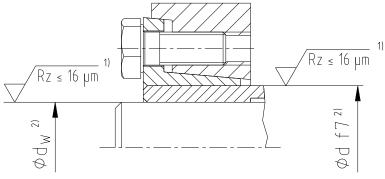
Tolerances and surfaces (example: CLAMPEX® KTR 620)
